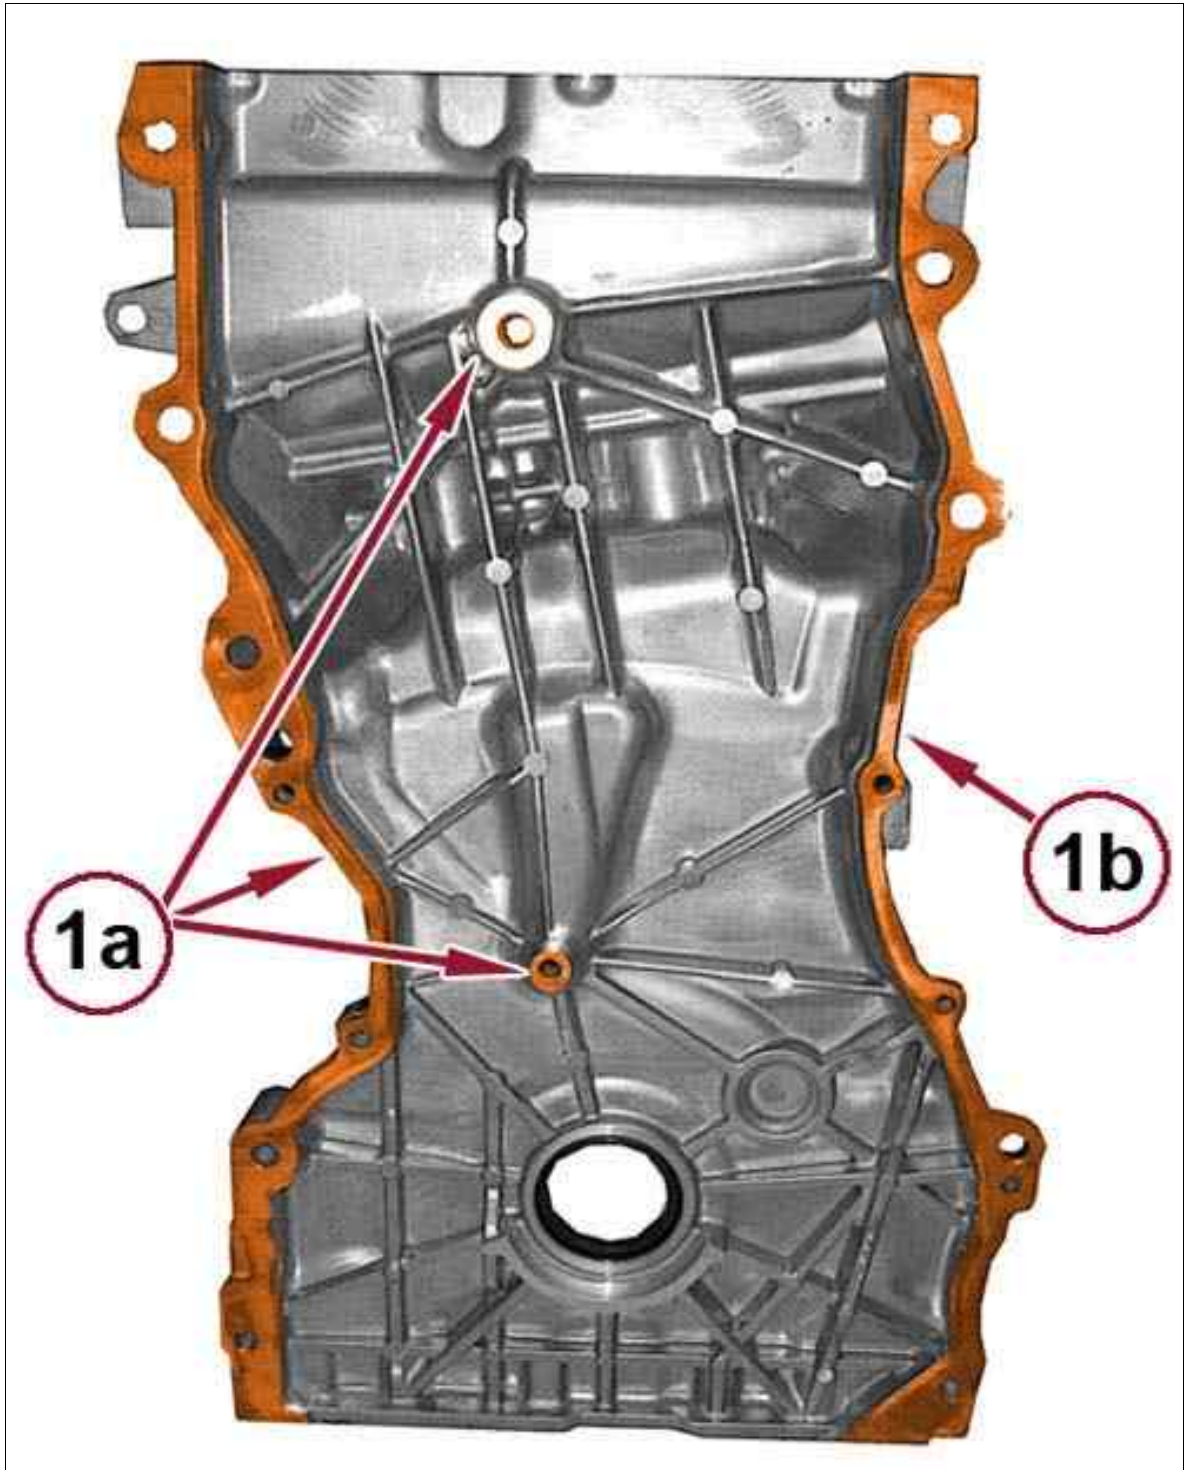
Applying Sealant To Engine Timing Cover To Engine Block Gasket Surface
